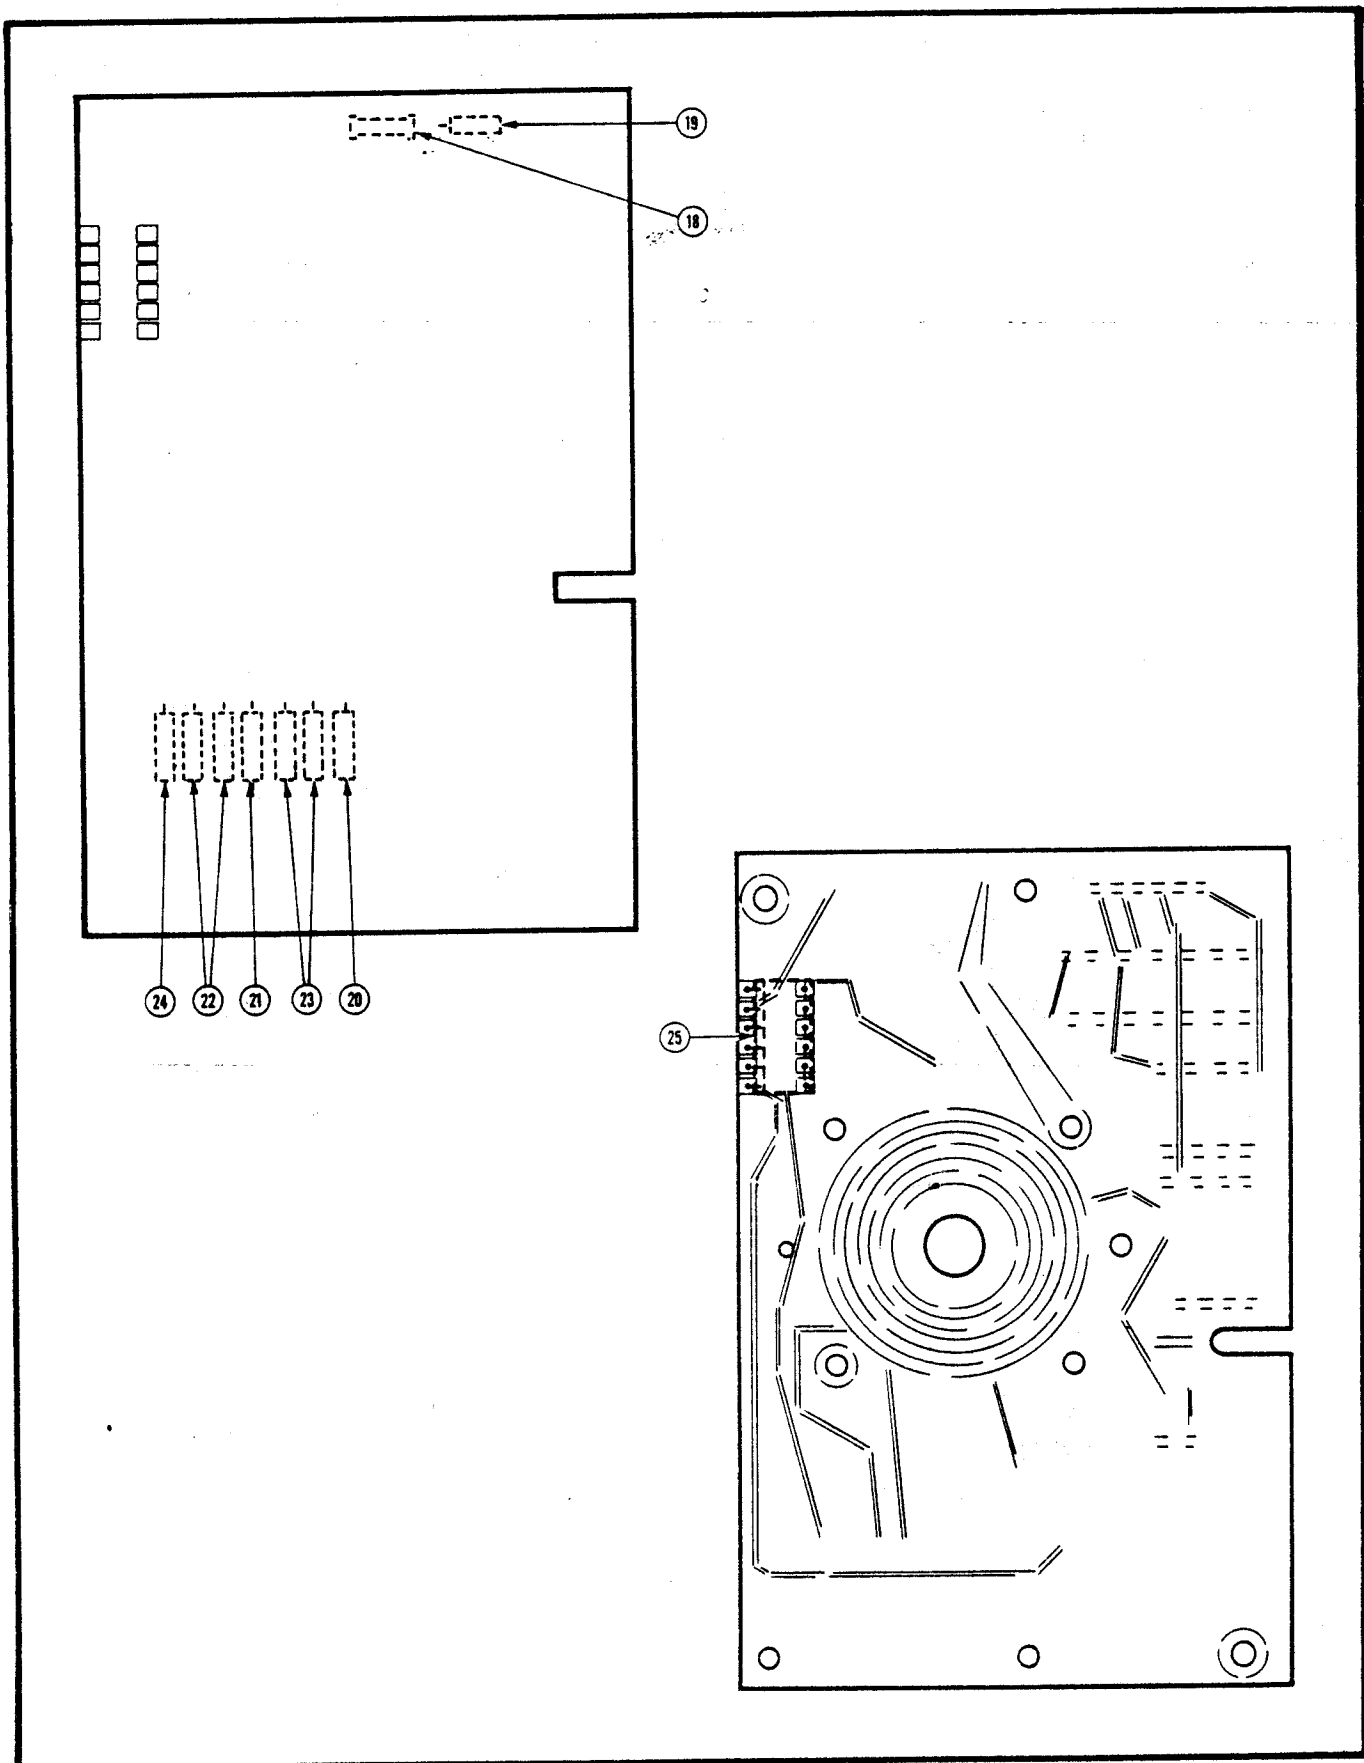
A10 Circuit Board Assembly, B Timing (sheet 2 of 2).
